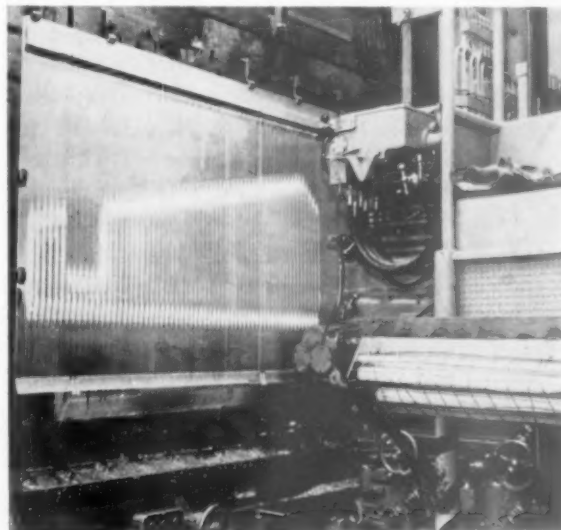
When the sheet is held in a vertical position as shown here, the chip removal problem is easily solved.
